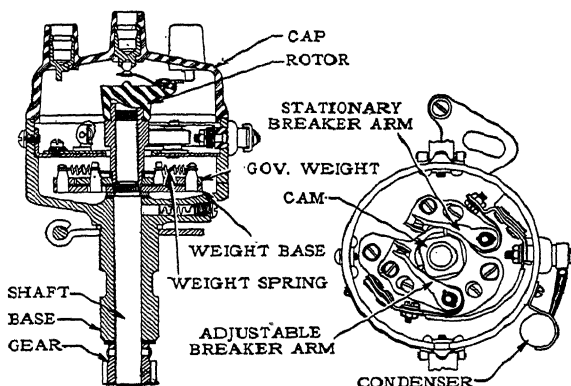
Four-lobed contact breaker unit with two contact breakers, for eight-cylinder engine.
